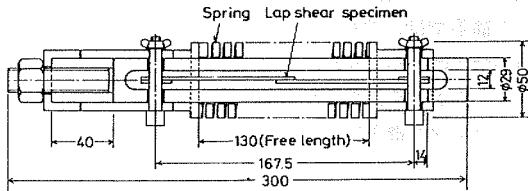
Fixture for applying sustained load to lap shear specimens.
